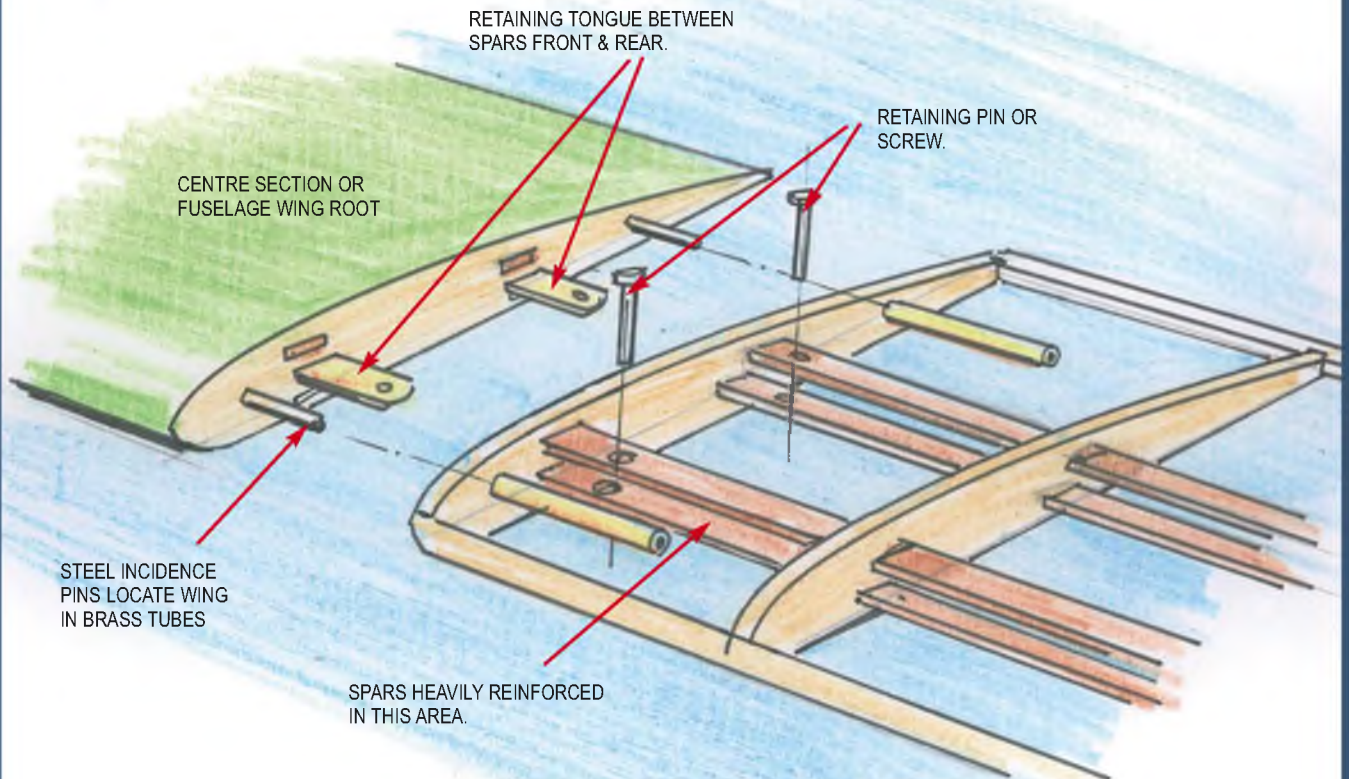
RETAINING THE WINGS AT FUSELAGE/CENTRE SECTION.
